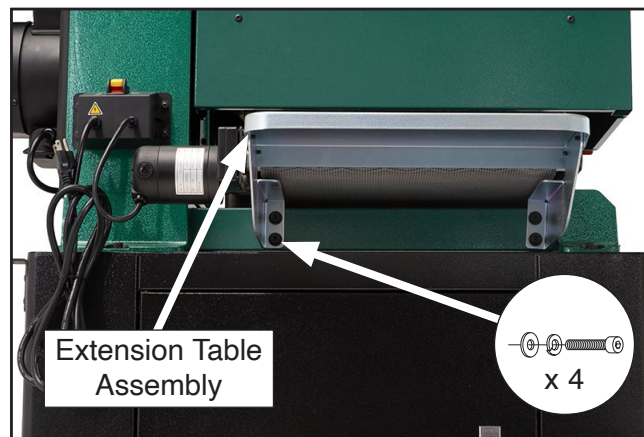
Extension table assembly attached to outfeed end of conveyor base.
